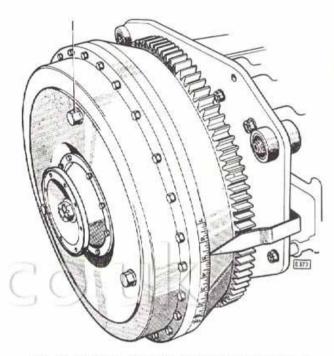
Position of engine flywheel for fuel-injection pump spill cut-off point and (1) for filling or topping-up.
